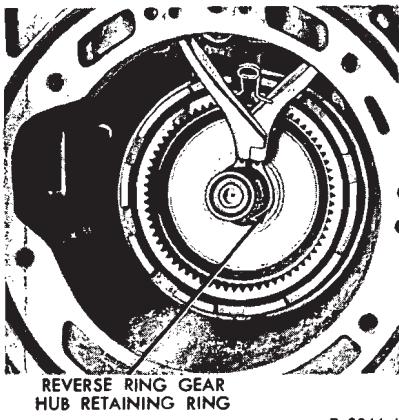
Removing or Installing Reverse Ring Gear Hub Retaining Ring
